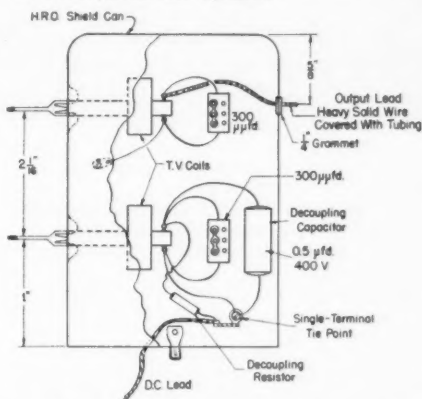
Details of assembly of the i.f. transformer made from TV horizontal-oscillator coils.
